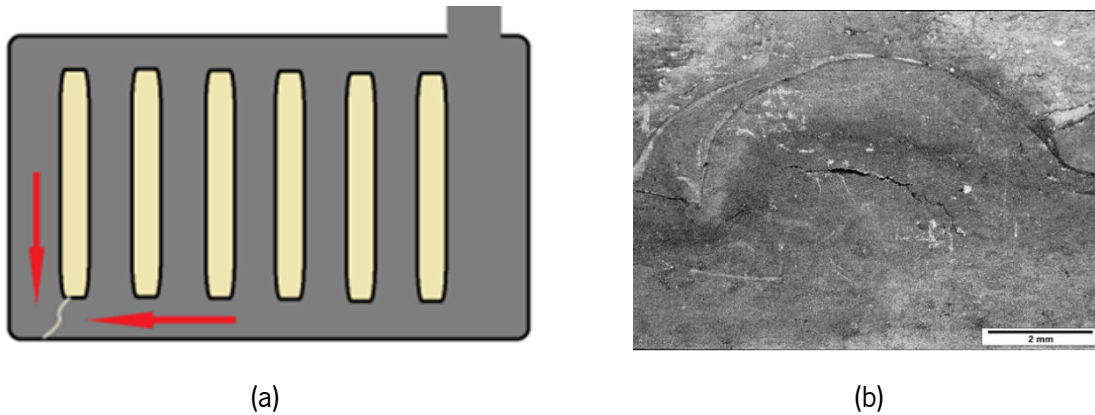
Cold shut (a) schematic representation and (b) in a real casting piece.
